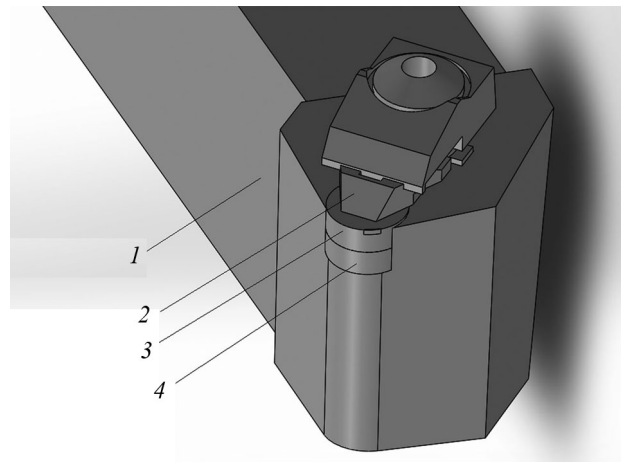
CAD model of the tool in 3D: toolholder (1), clamp plate (2), insert (3), anvil (4).
